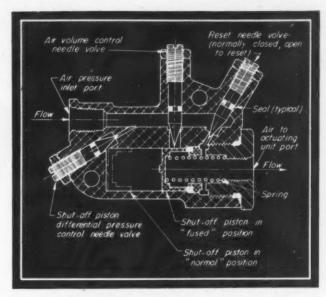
Above—Weston adjustable pneumatic fuse for gage and line protection
